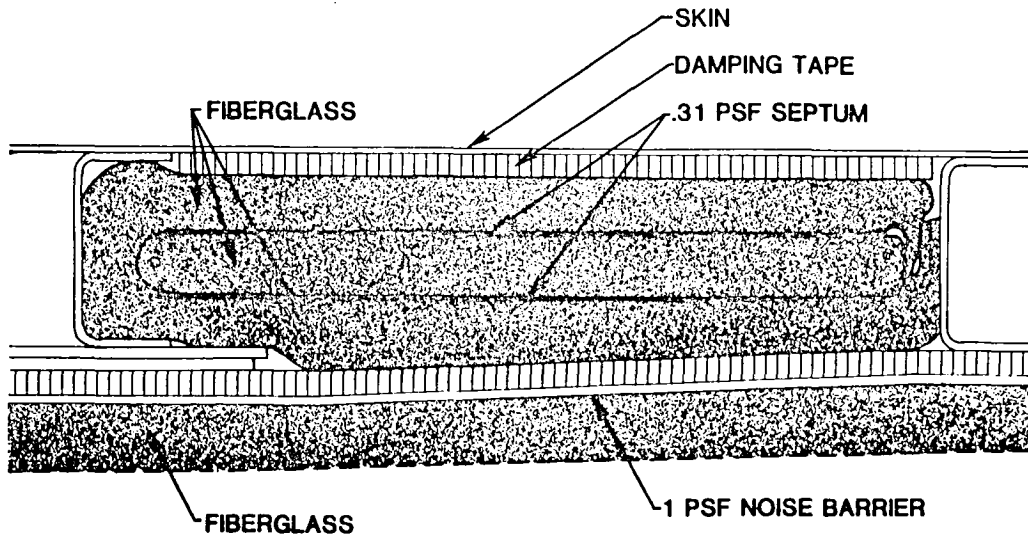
Typical section through wall and acoustic treatment in area of the prop plane.
